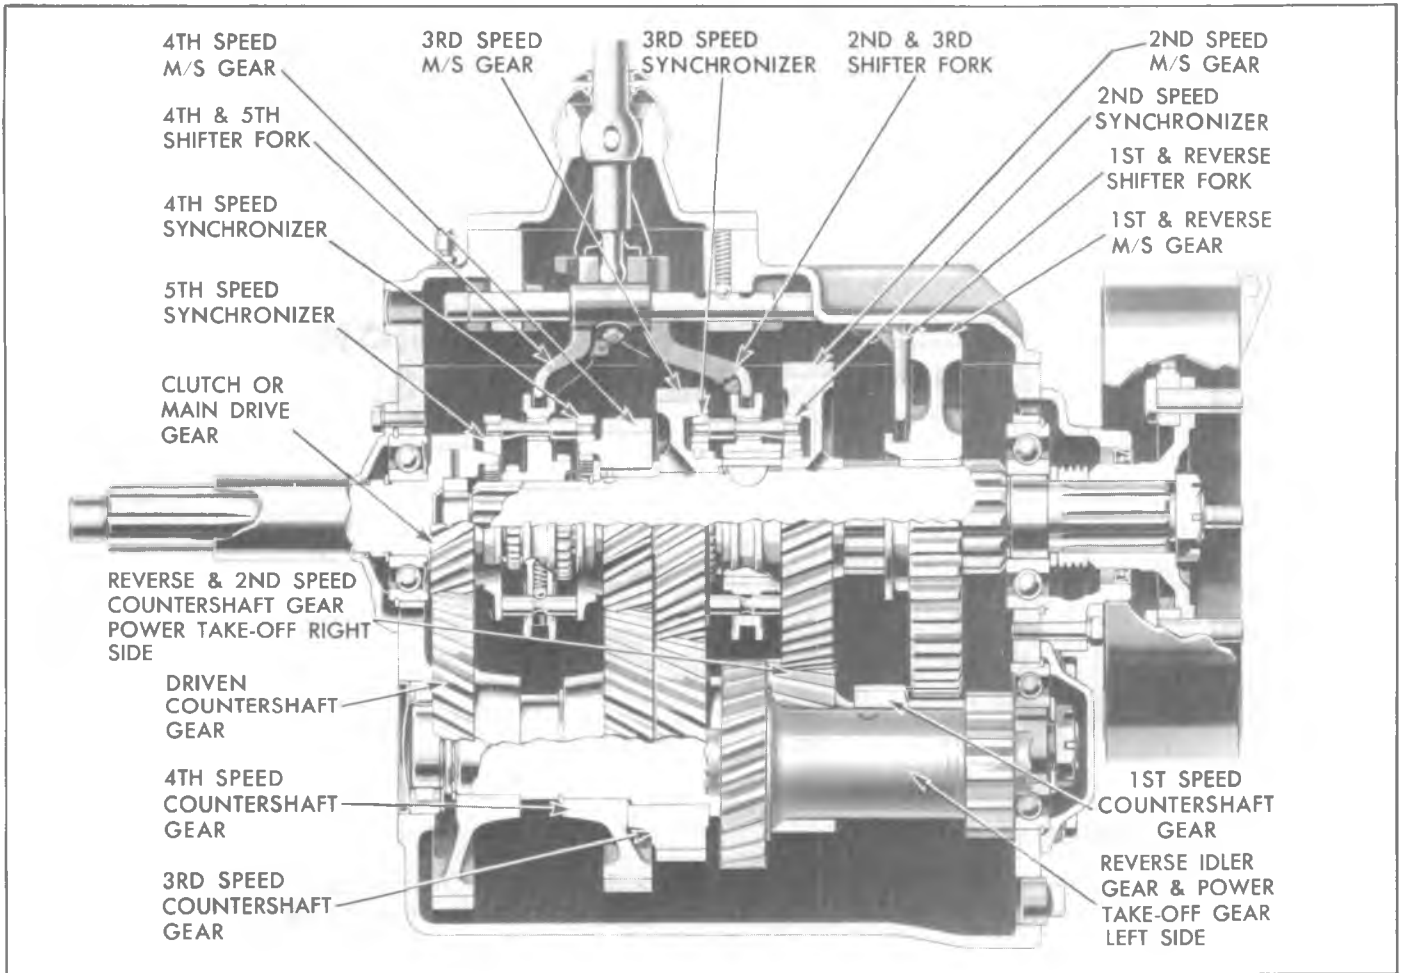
S—Spicer 5-Speed Transmission Cross Section
